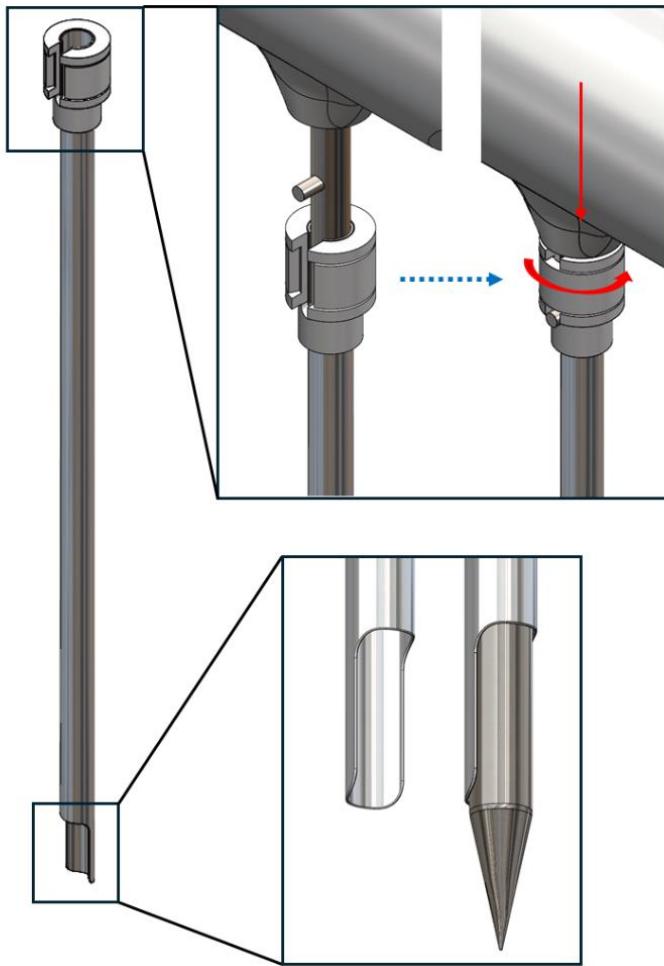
Portal CAD model, which features the shield, the interlocking mechanism, as well as the three parts that make up the Portal assembly (Portal Shaft, sleeve, and C-ring)
